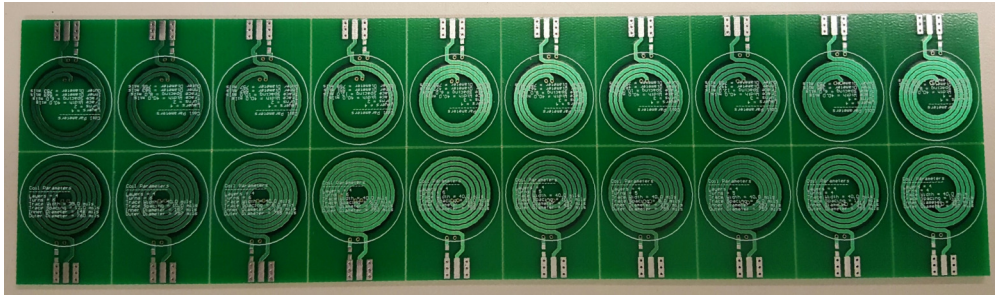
A v-scored PCB with 20 multi-layer PCB coils. Each has an outer diameter of approximately 20 mm with variable turns and trace spacing.
